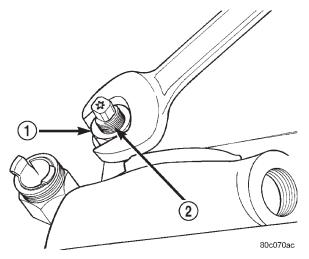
Front Band Adjustment Screw Location – LOCK-NUT
